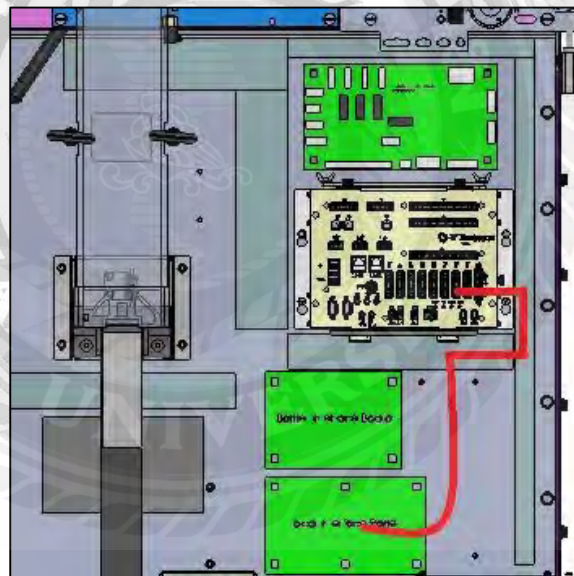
Cable Routing for STE 9812-0520 REV00
